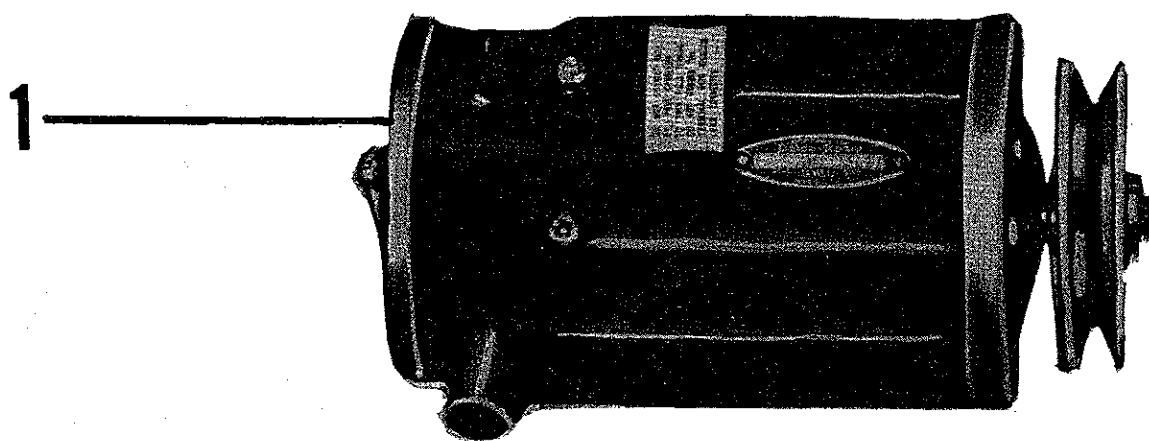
Generator/Alternator Bracket - Wide Cylinder Flange Engines
